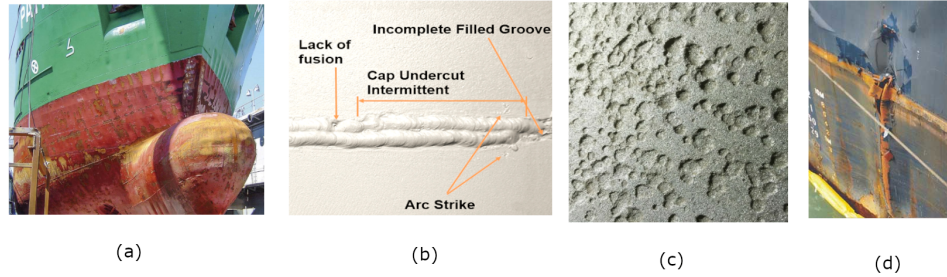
Most common degradation mechanisms: (a) wear in paint (b) welding defects (c) pitting corrosion (d) buckling
